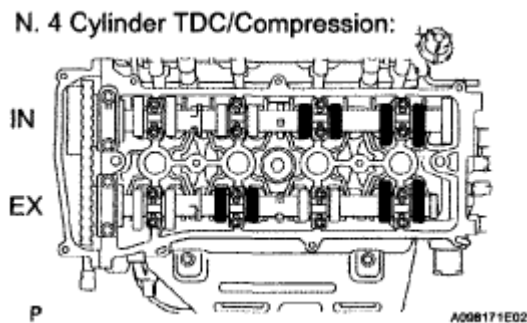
Identifying Valve Position Of Cylinder (No.4)
